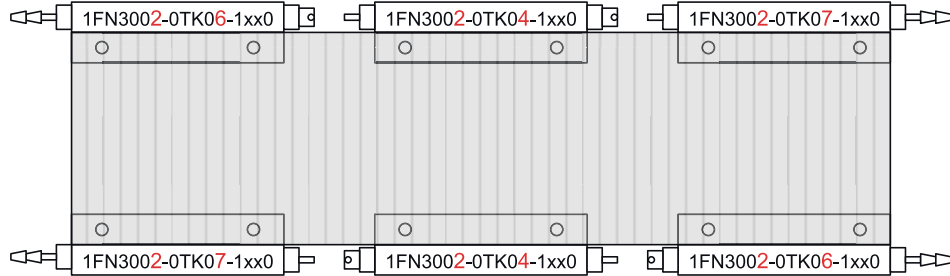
Heatsink profiles for secondary section track sizes 1FN3050-4SA00-0AA0, 1FN3100-4SA00-0AA0, 1FN3150-4SA00-0AA0
